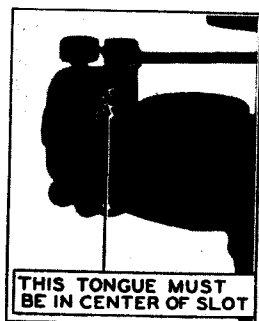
Before adjusting the carburetor, make sure that the enriching control rod is properly adjusted.
